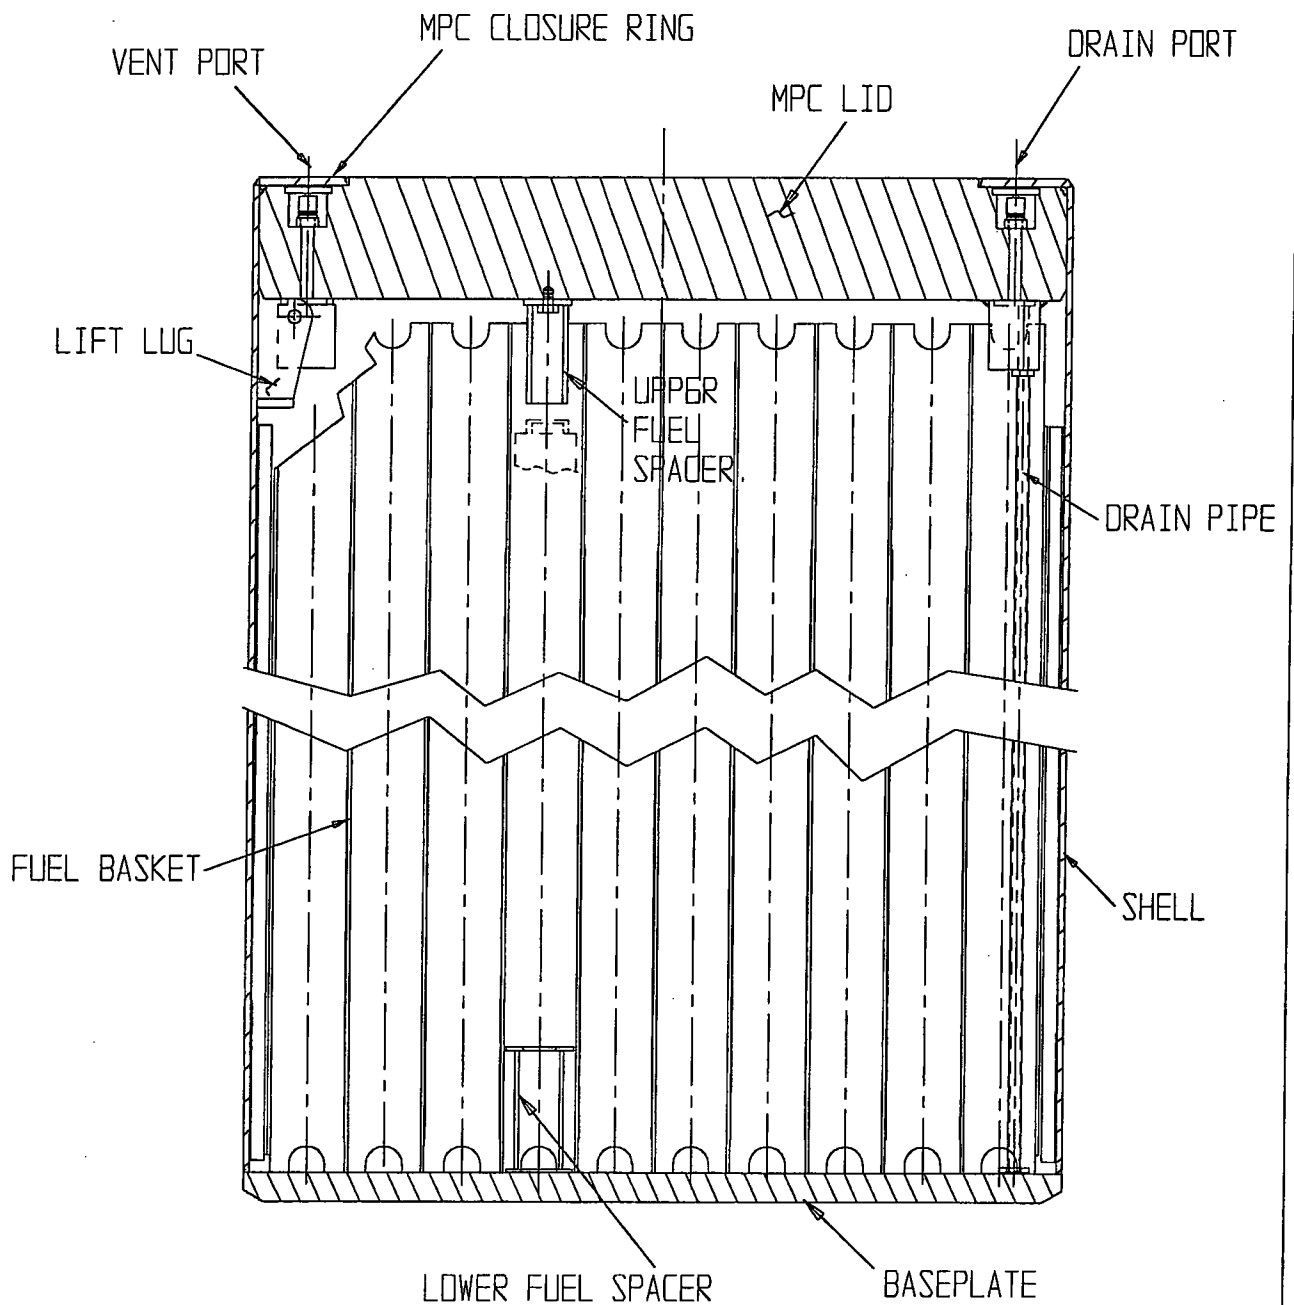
; CROSS SECTION ELEVATION VIEW OF MPC
